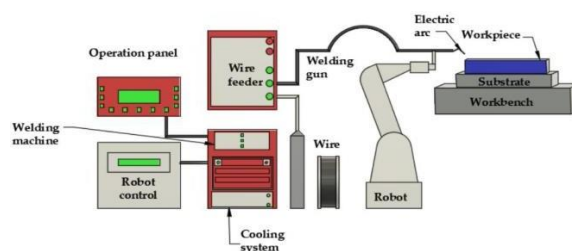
Wire and Arc Additive Manufacturing System Using Cold Metal Transfer (CMT) Diagram
